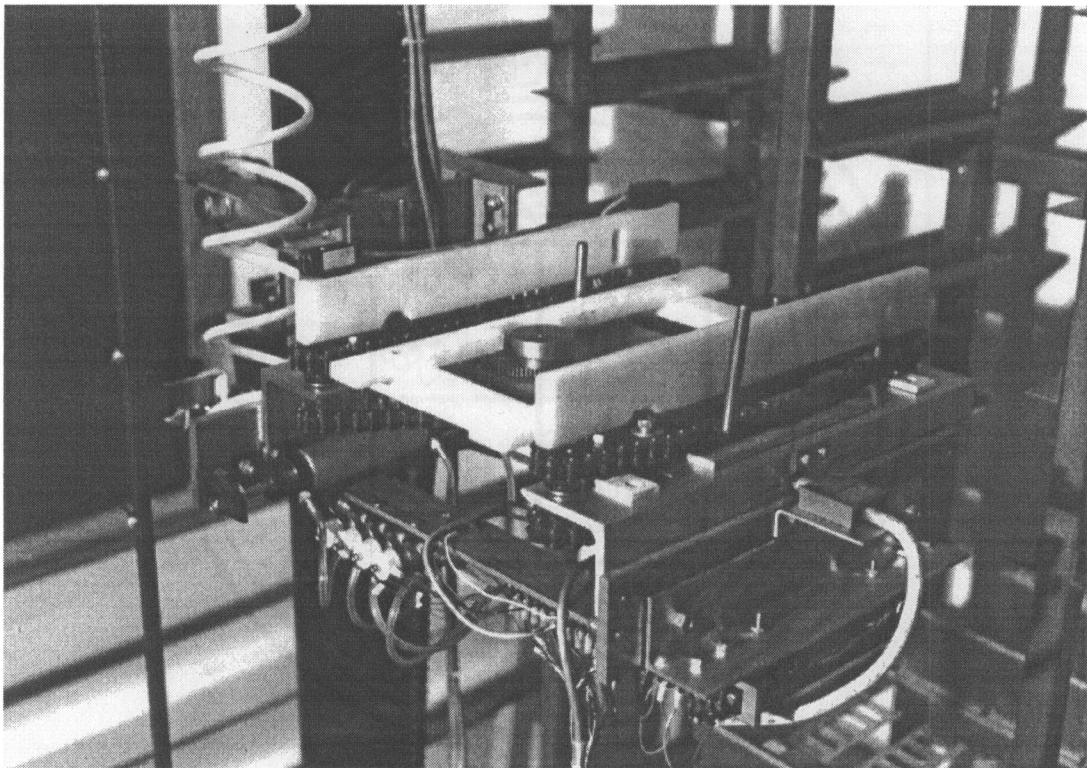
General arrangement of AS/RS shuttle and unit-load handler.
